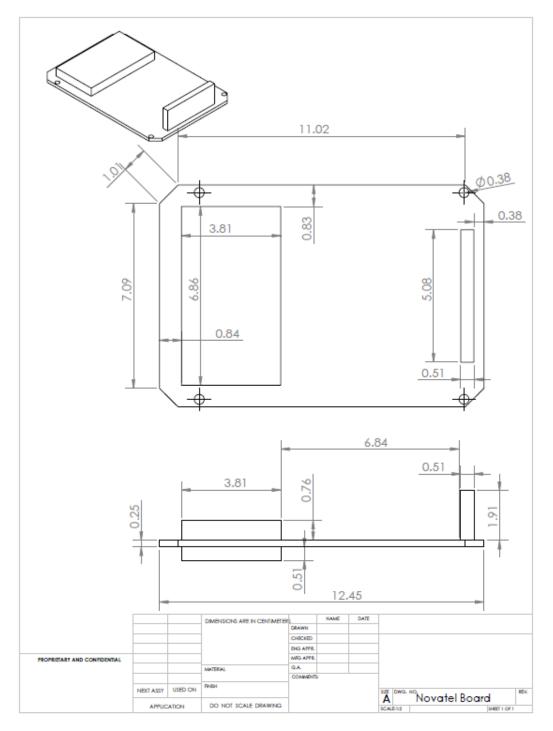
Mechanical drawing of the Novatel GPS board with dimensions in centimeters.
